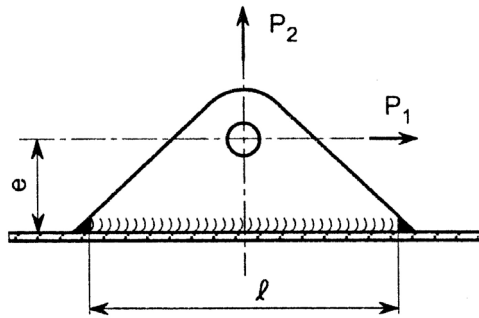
Fillet weld joint with normal and shear forces
